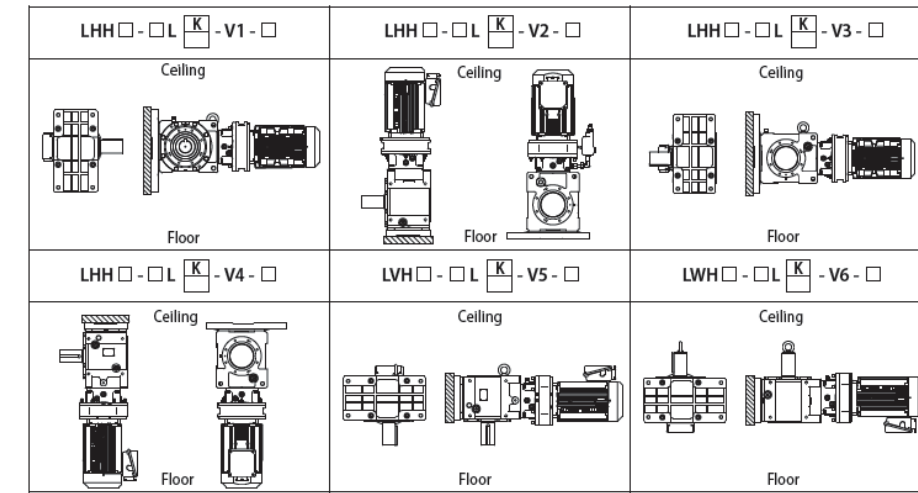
Solid Output Shaft Right (R) - Mounting Foot Side
